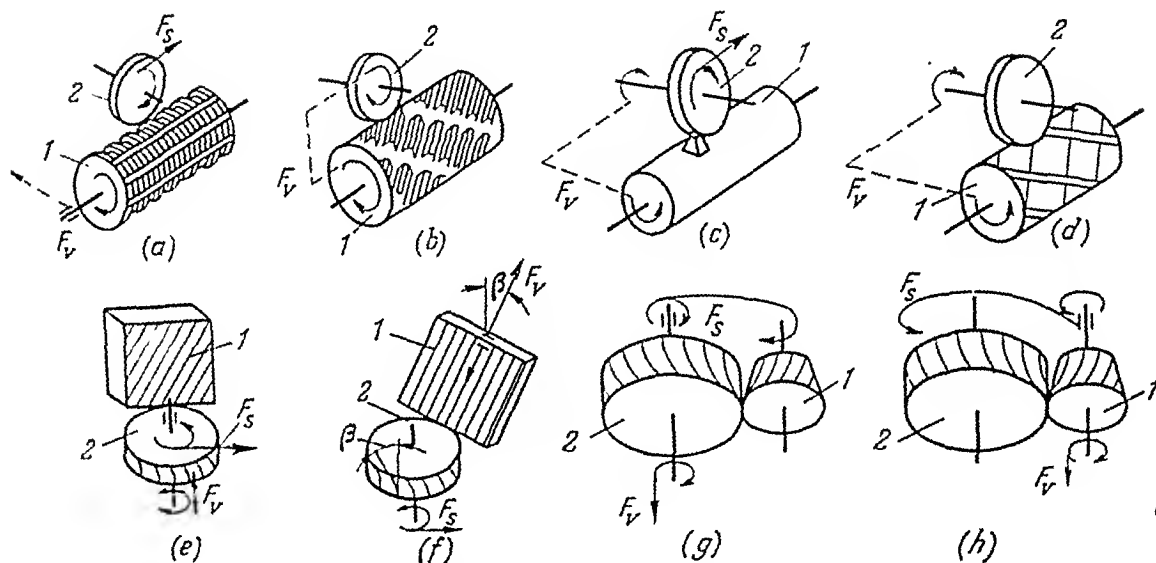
Examples in which the shape and size of the cutting tool affect the operative motions in gear cutting
